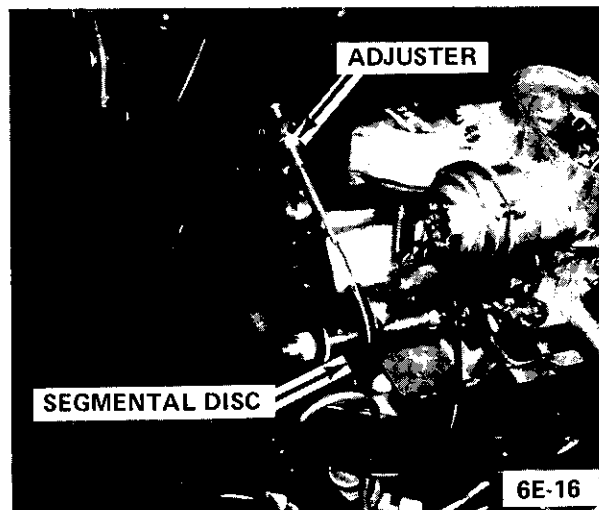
E-16 Bowden Control Wire Adjuster and Segmental Disc
